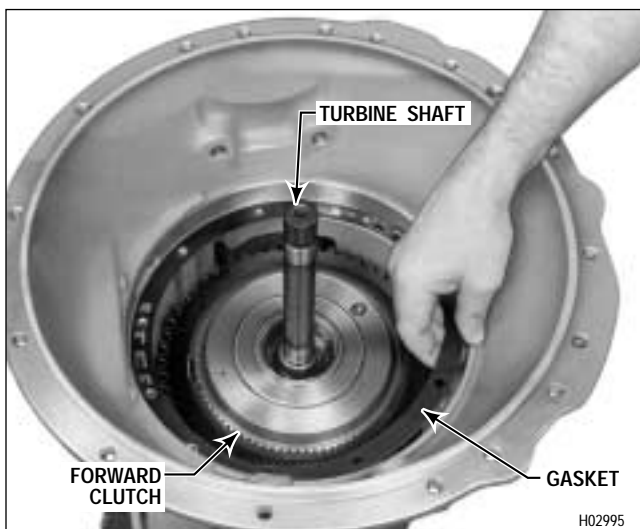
Installing Front Support Gasket (Models Without Retarder)
